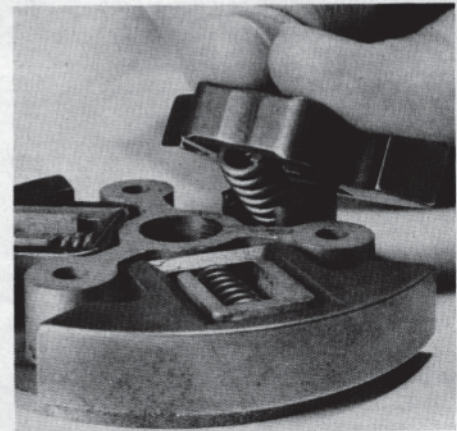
Although clutch shown above is not used on model EZ or Chipper, easy method of clutch spring and shoe installation is shown.
